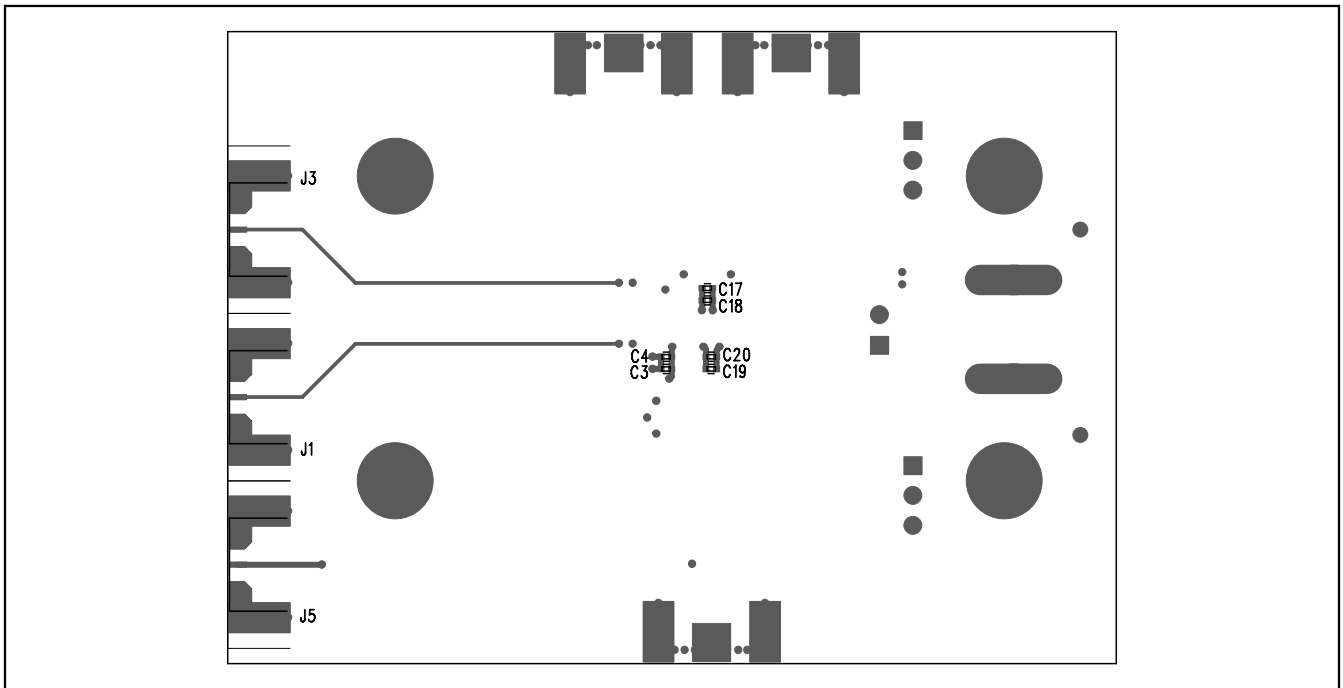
MAX3622 EV Kit Assembly Drawing—Bottom Side
